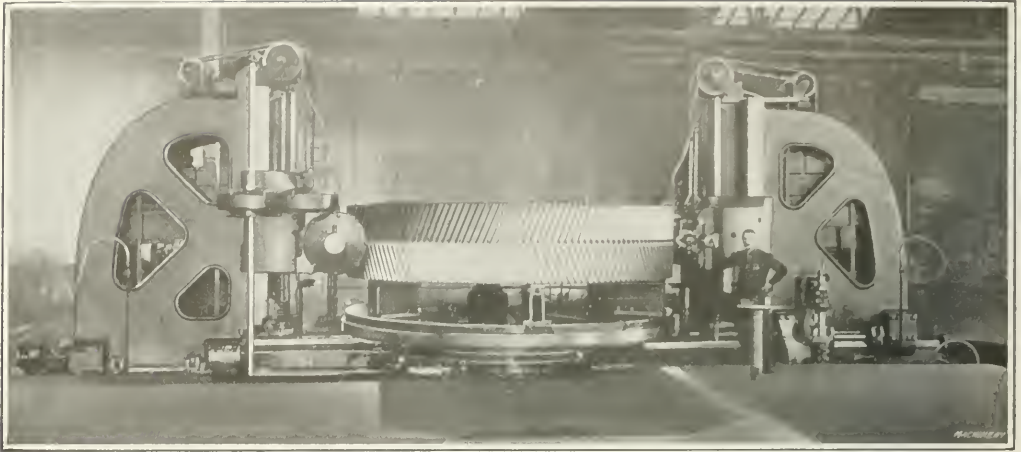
General View of Falk Herringbone Gear Hobbing Machine working on a Large Gear
